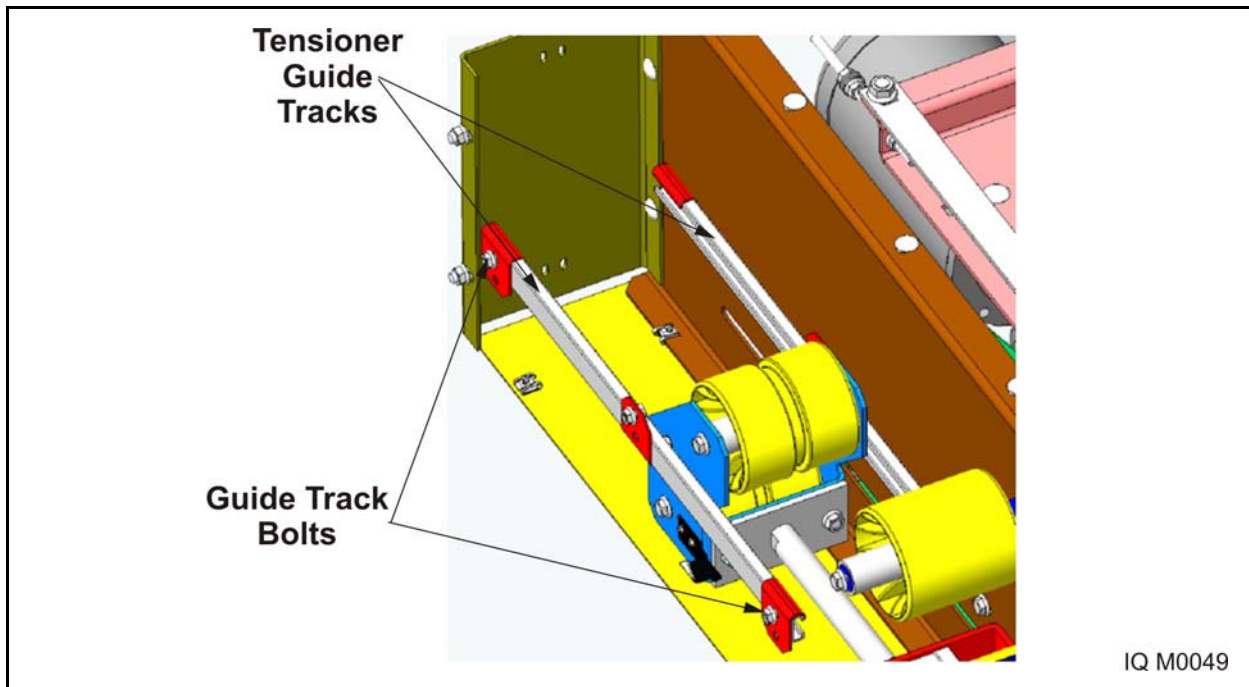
63 Tensioner Guide Tracks (installing the guide track bolts)
